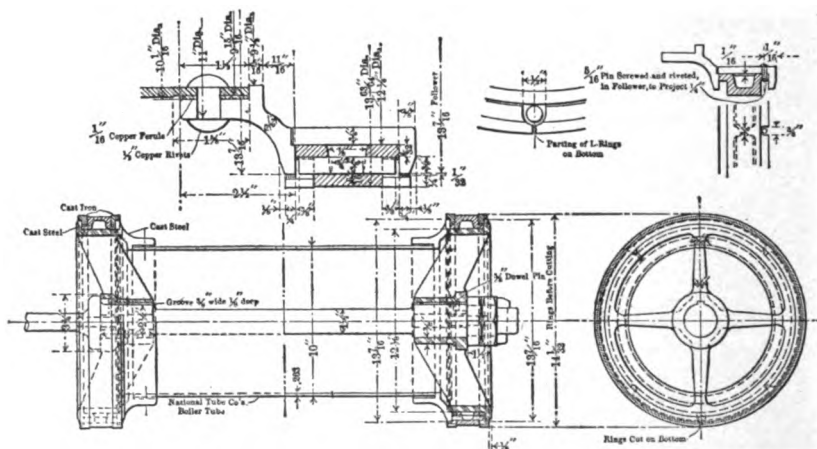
Piston Valve used on the Cole Balanced Compound Locomotive
